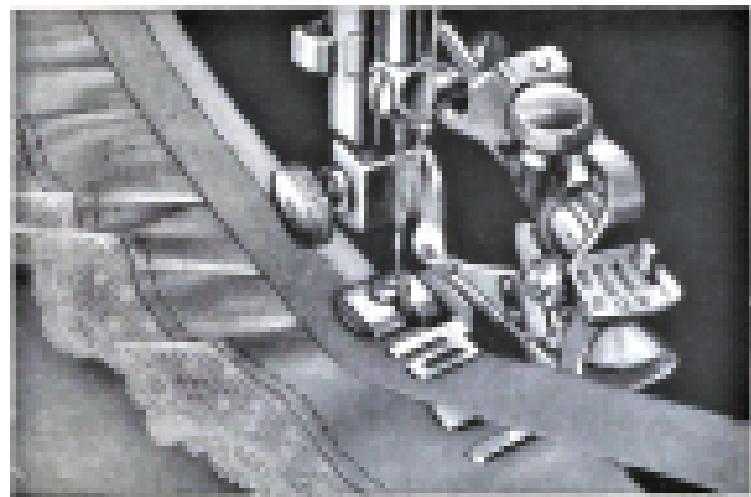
Making a Ruffle and Attaching It with a Facing in One Operation
